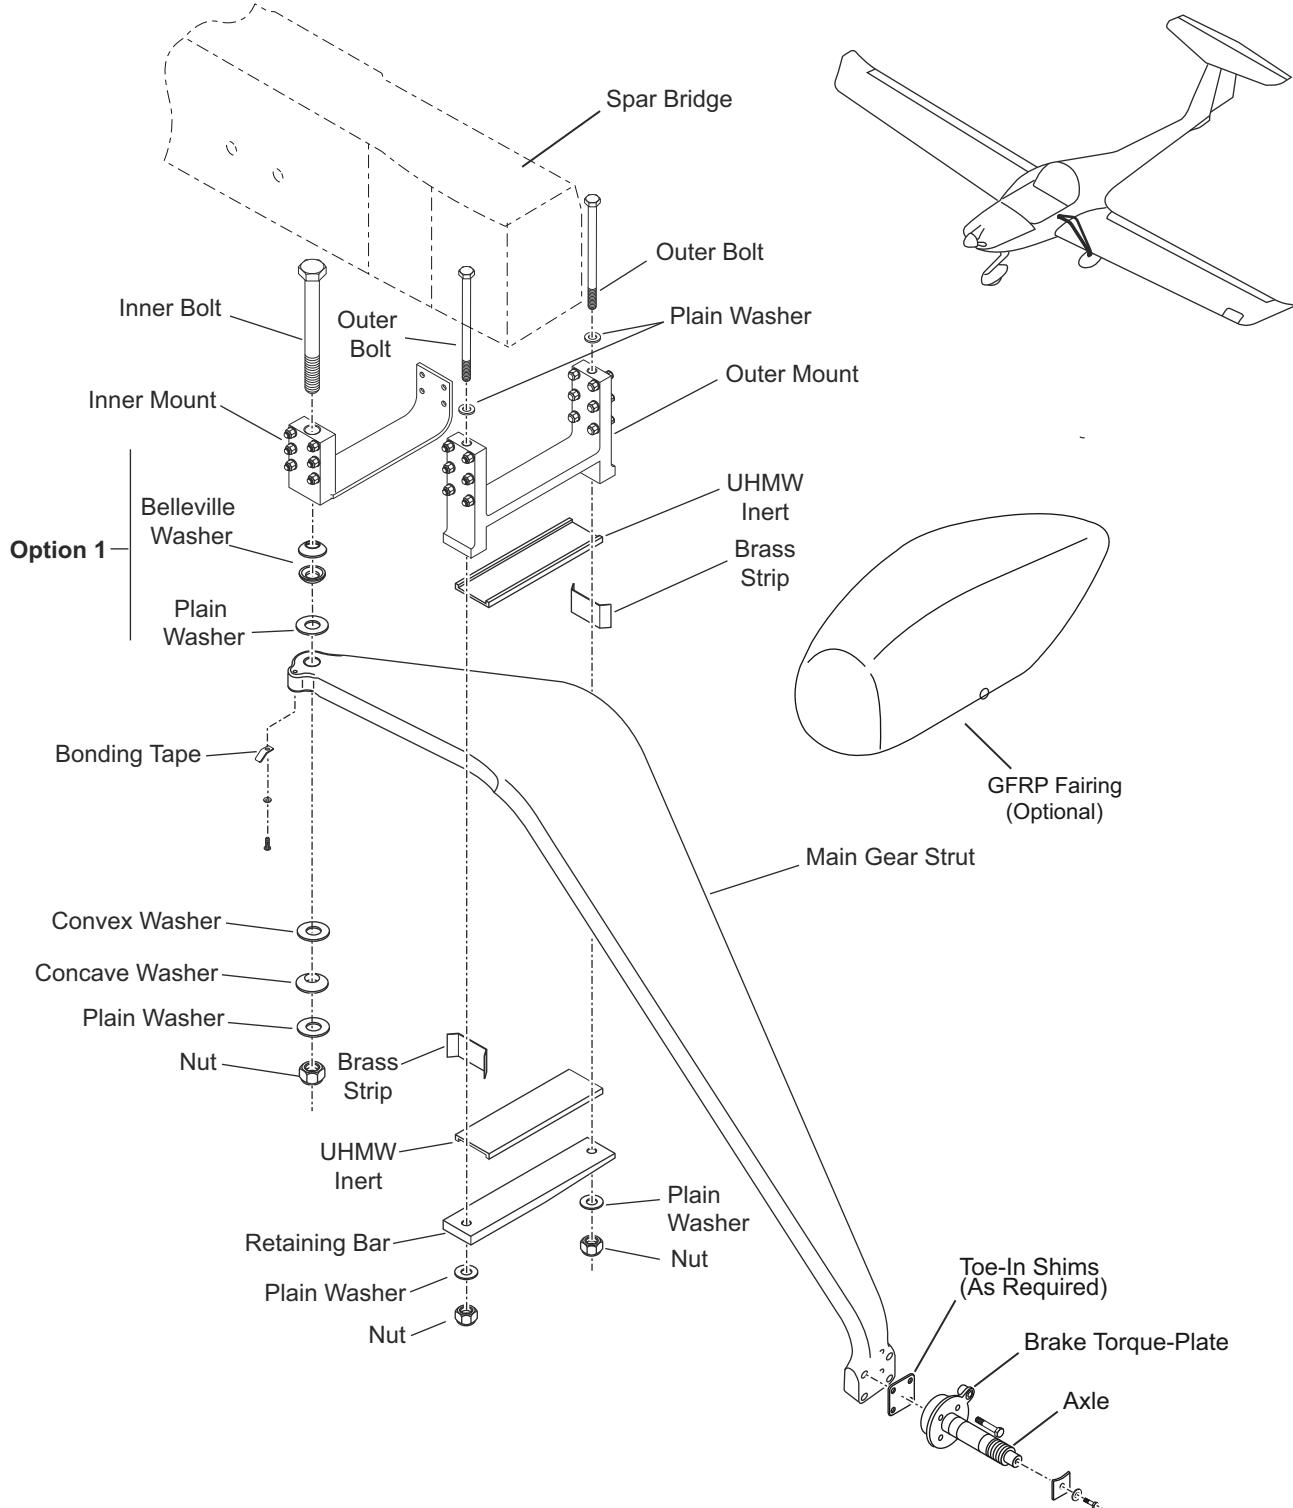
Main Landing Gear (Sheet 1 of 3)
